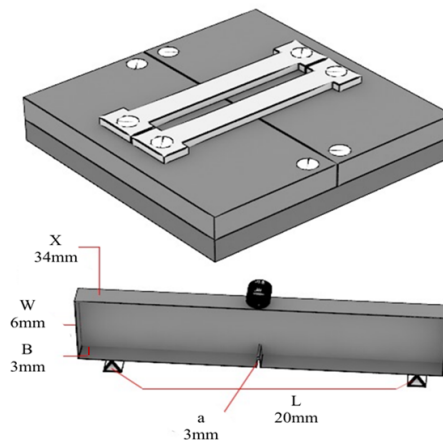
PTFE mould used for specimen, specimen dimensions and geometry.
